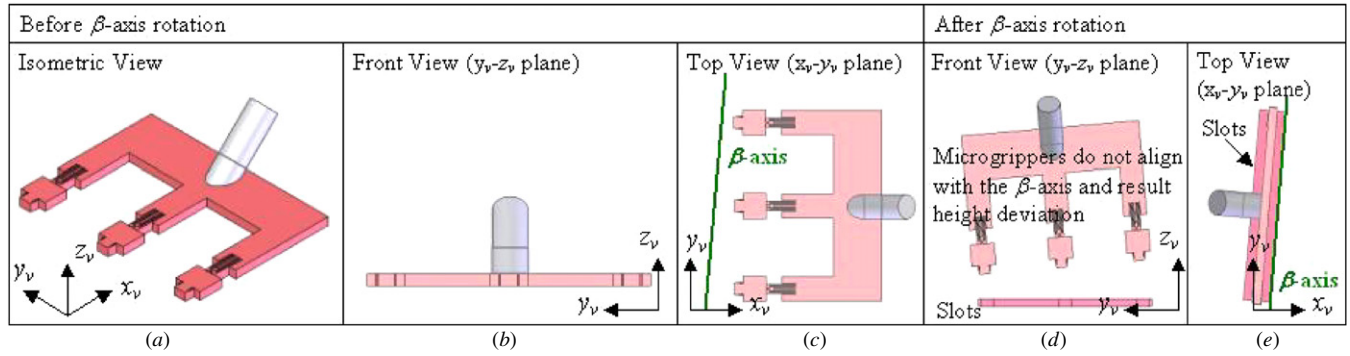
Different camera views without the γ -axis correction: (a) isometric view; (b) front view; (c) top view of the microgrippers; (d) front view and (e) top view of the microgrippers after β -axis 90° rotation.
